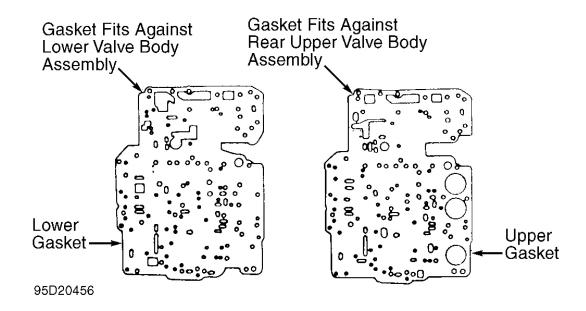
Gaskets For Location On Lower Valve Body Assembly Courtesy of ISUZU MOTOR CO.
